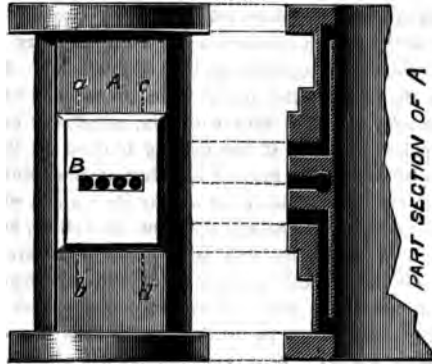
CYLINDER FOR SLIDE VALVE ENGINE.
